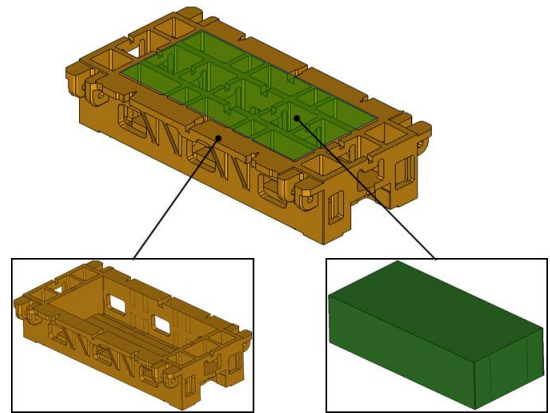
Shape and dimension of the rib with the initial tool structure design
